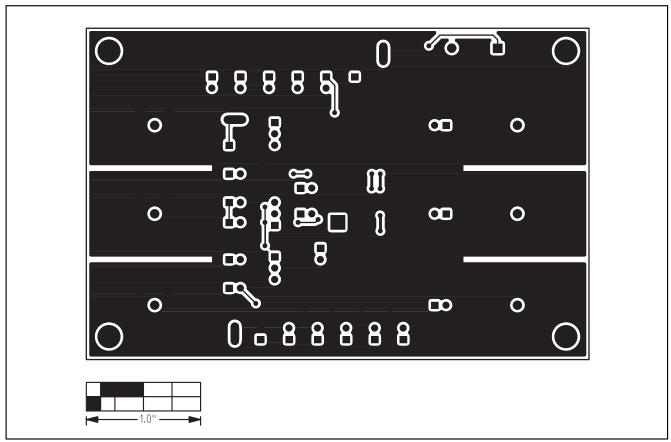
MAX7438 EV Kit PC Board Layout—Solder Side
